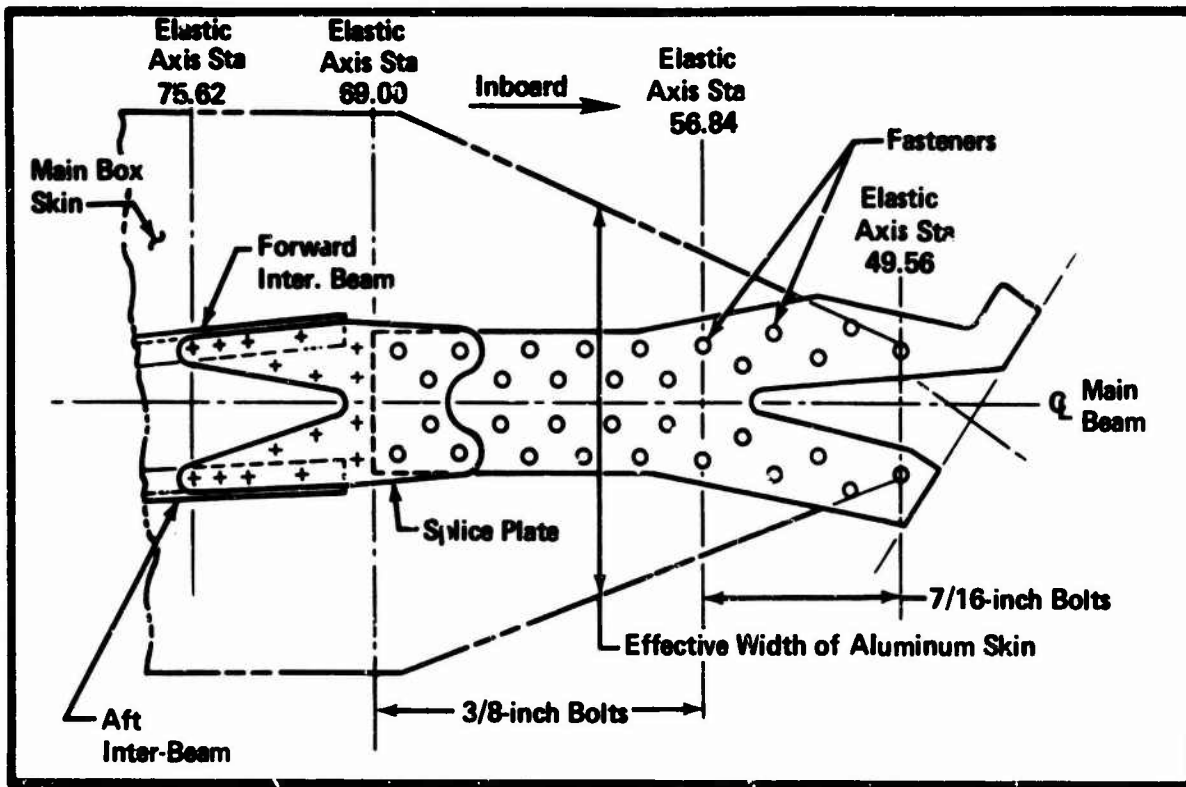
Plan View of Horizontal Stabilizer Inboard Splice Joint
